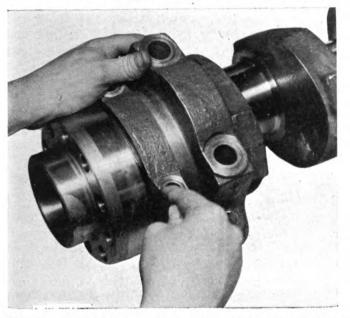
Checking Rear Main (Thrust) Bearing Before Installing in Engine
